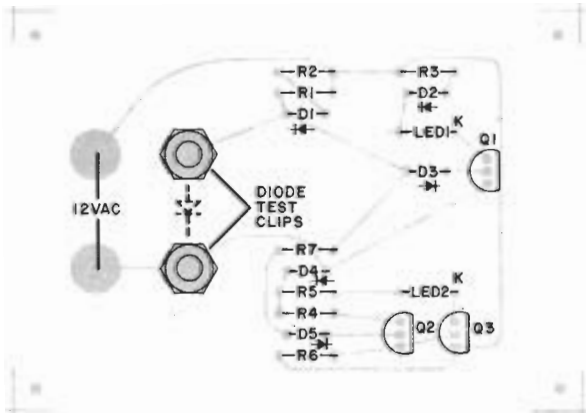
Pc board can be used as case cover with component mounting as shown at left.
